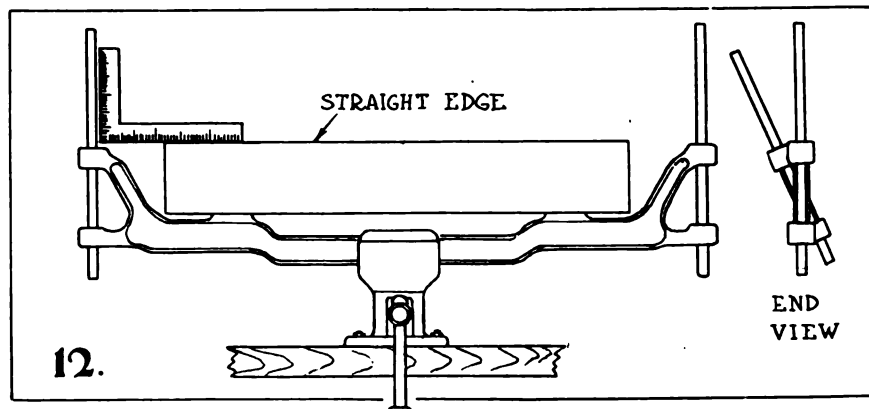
The straight edge is used as a gage, to determine when the spring perches are on the same level and plane. Then arbors are inserted in the spindle holes, and the axle twisted until the two come into line. A square, placed on the straight edge, is used as a gage, to show when the spindle holes are parallel
